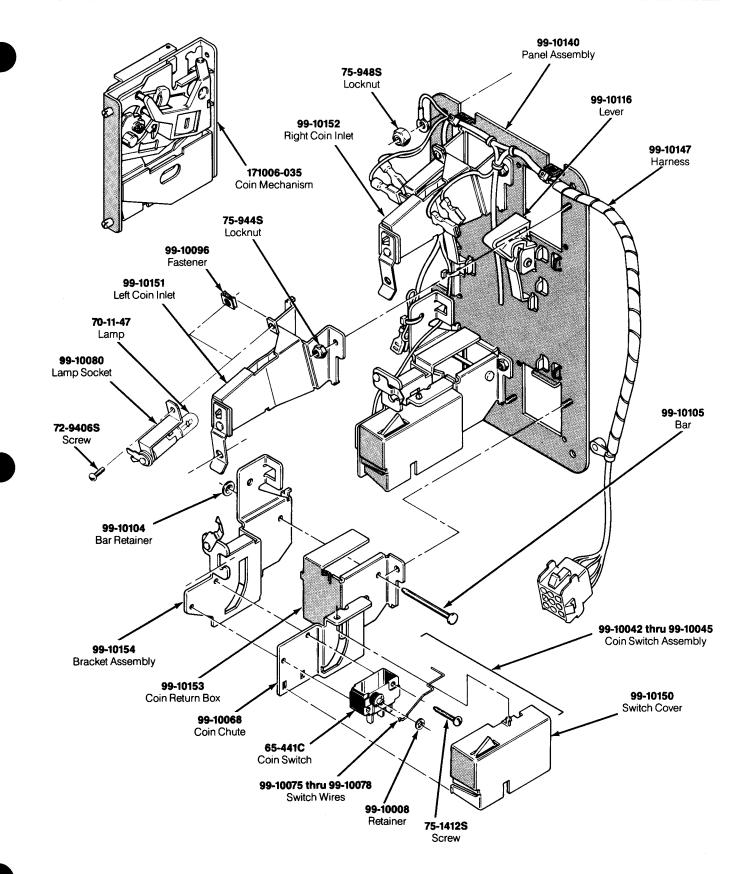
Coin Acceptors, Inc. Coin Door Assembly 171027-001 A
